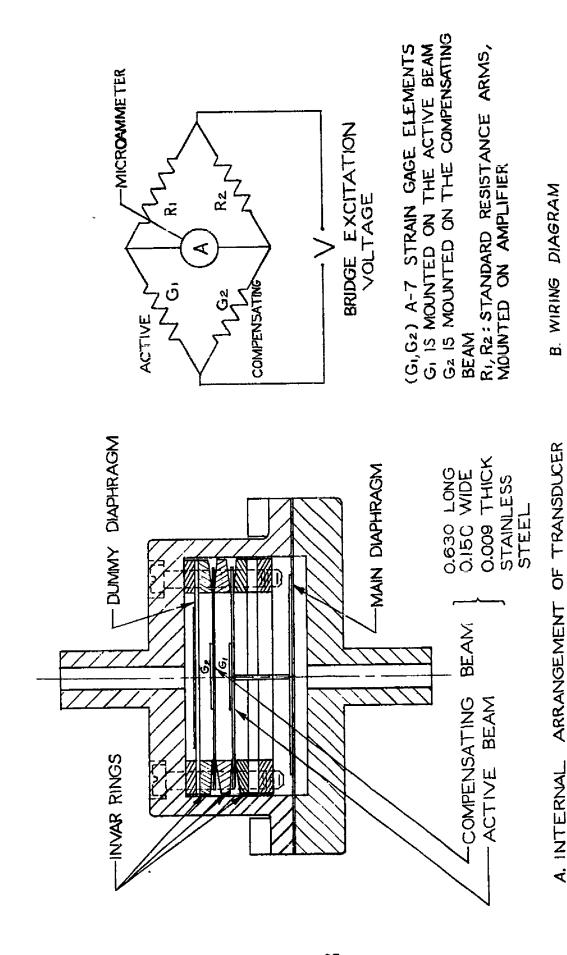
2 - ARM BRIDGE ARRANGEMENT
